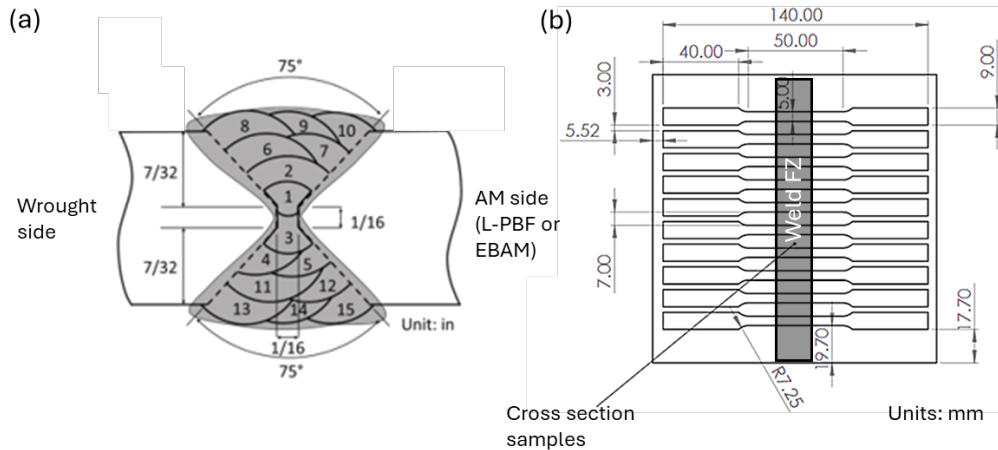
(a) Double V weld geometry with labeled pass sequence and (b) extraction plan of cross-weld tensile and metallurgical samples from top view
